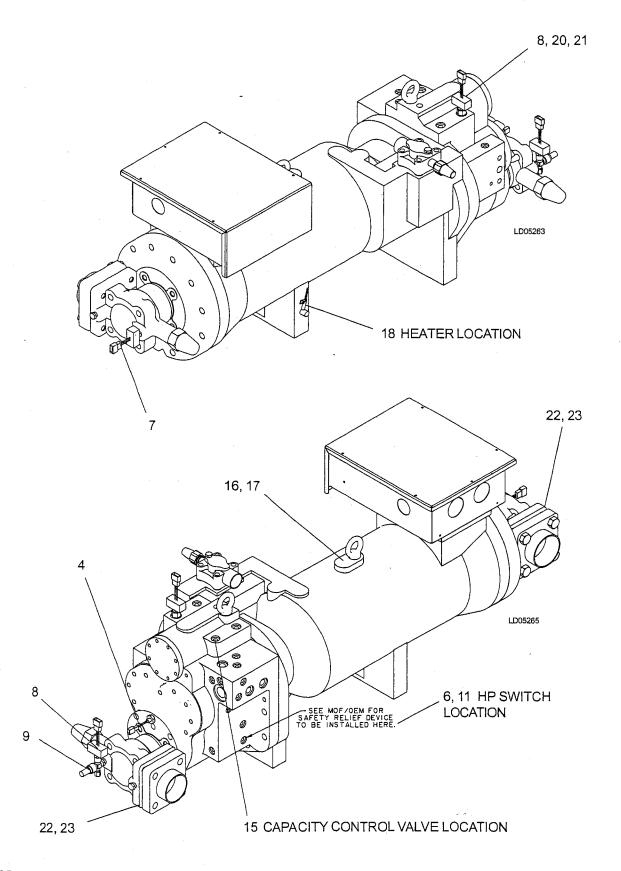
DXS COMPRESSOR OUTLINE (REF. TABLES 8 AND 9, PAGE 25)
